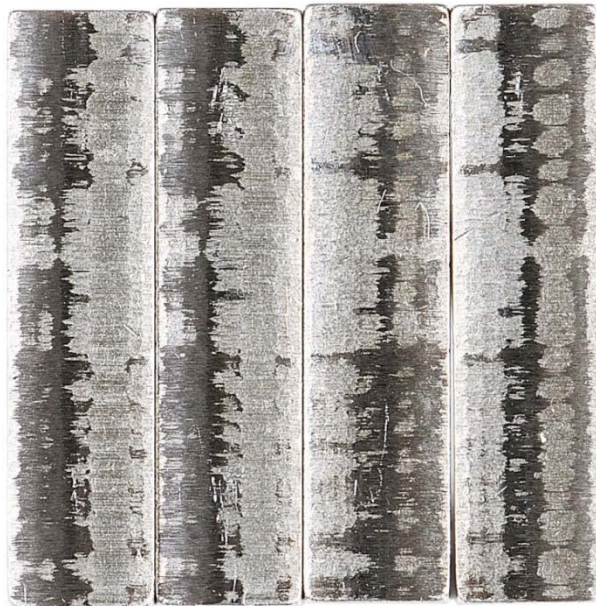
Pump SN: 16393232 Transfer Pump Blade Edges with 35-Hours Testing with JP-8 Fuel
